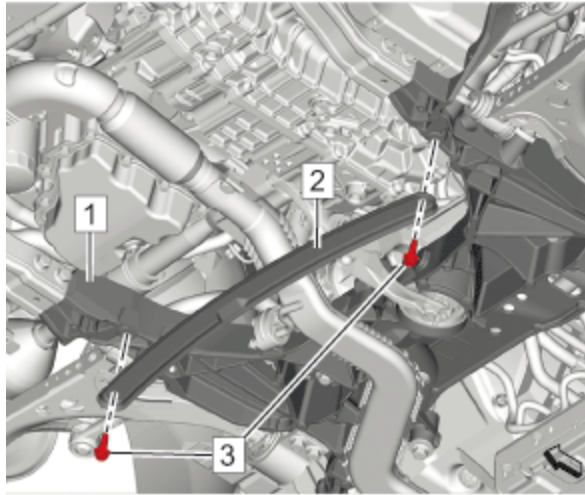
Drivetrain And Front Suspension Cradle, Brace And Bolt
